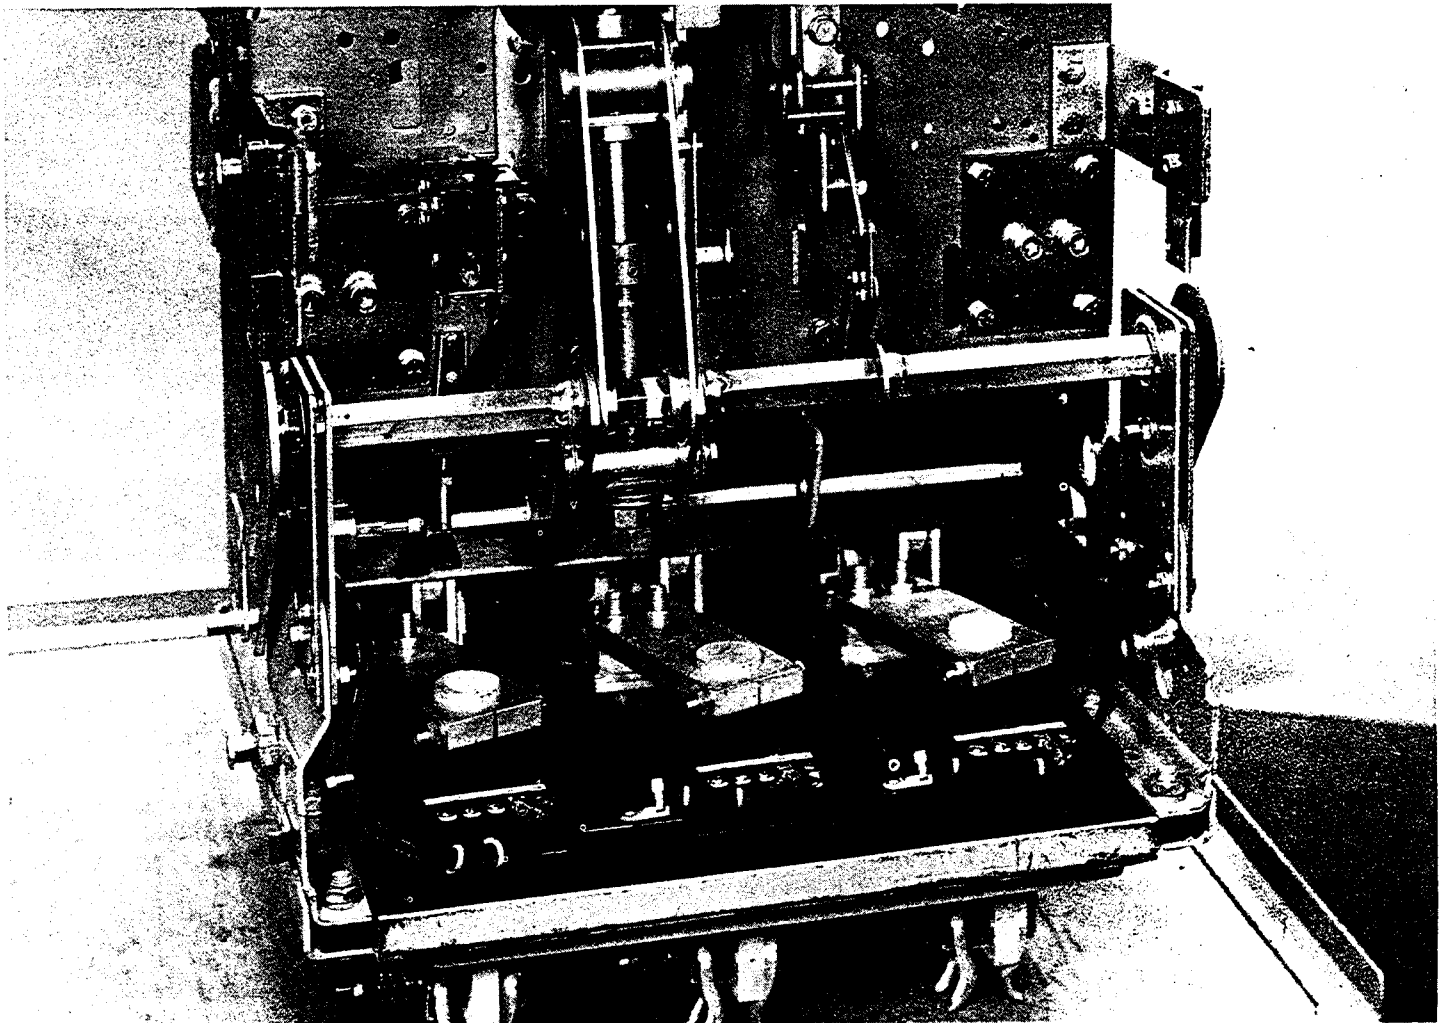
LOCATION OF RATCHET TOOTH NO. 1
